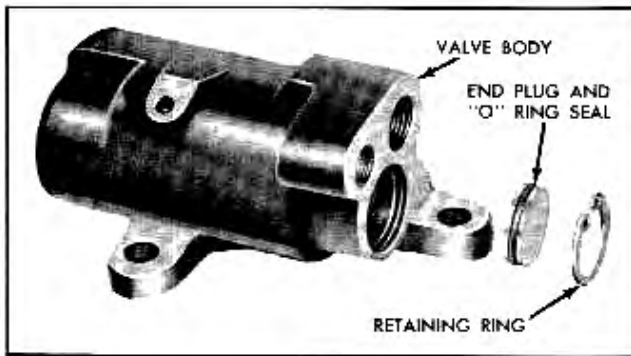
Valve Body End Plug Seal and Retaining Ring
